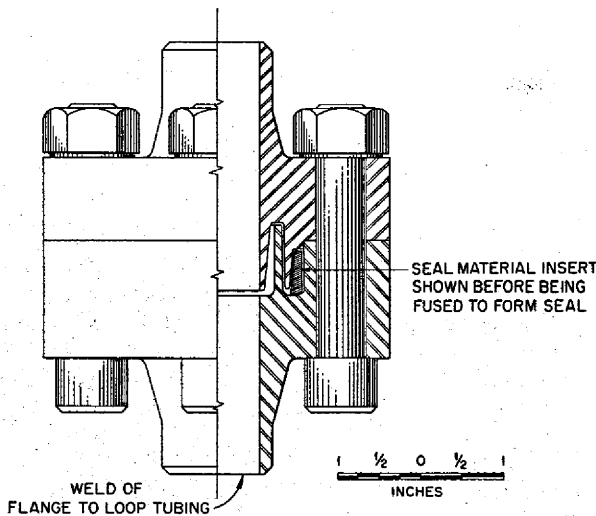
Diagram of Cast-Metal-Sealed Flange Joint.
